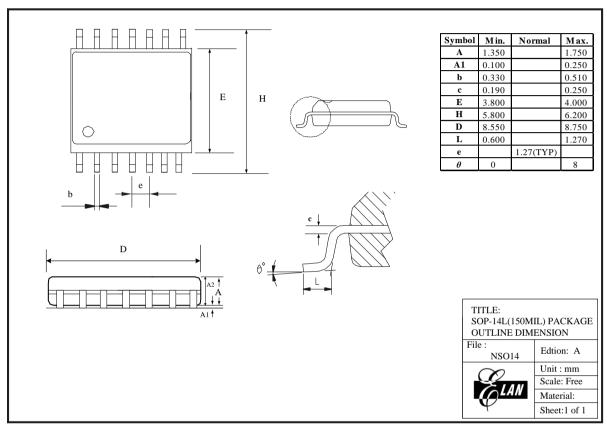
EM78P153B 14-Lead DIP/SOP Package Type
